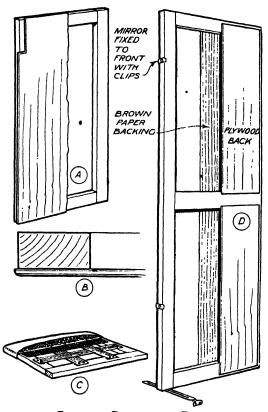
Construction Details. A and B. Method of making doors. C. Foot-rest details.
